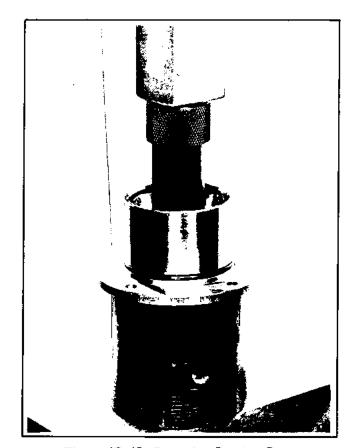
D-45. Removing Bearing Cone, Washer and Seal
